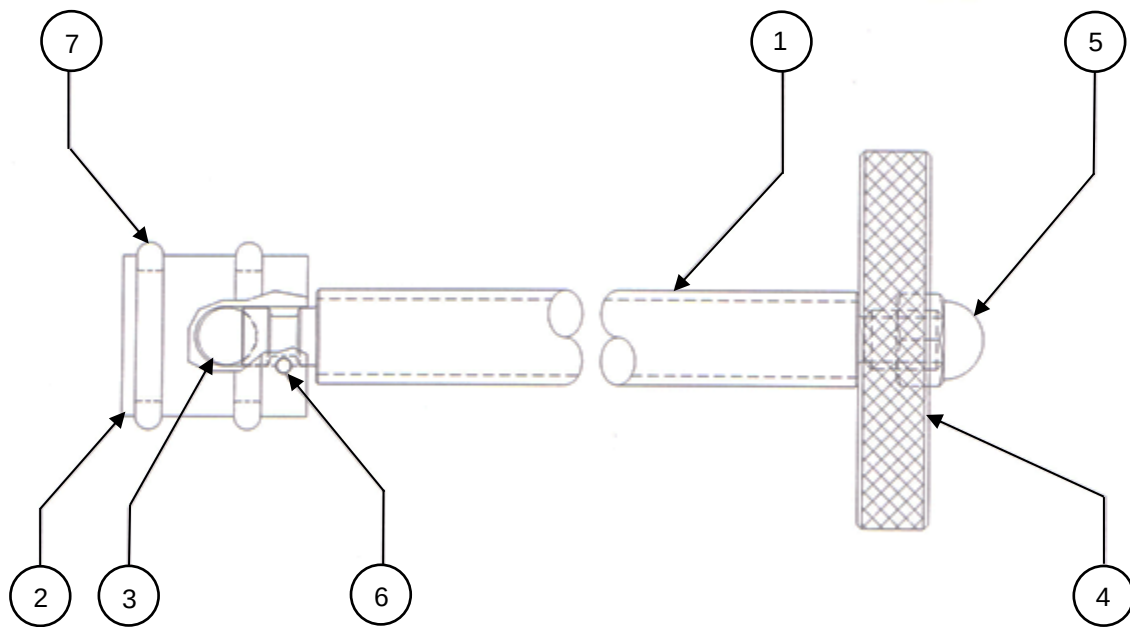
2311FA Piston, Shaft, & Handle Assembly
